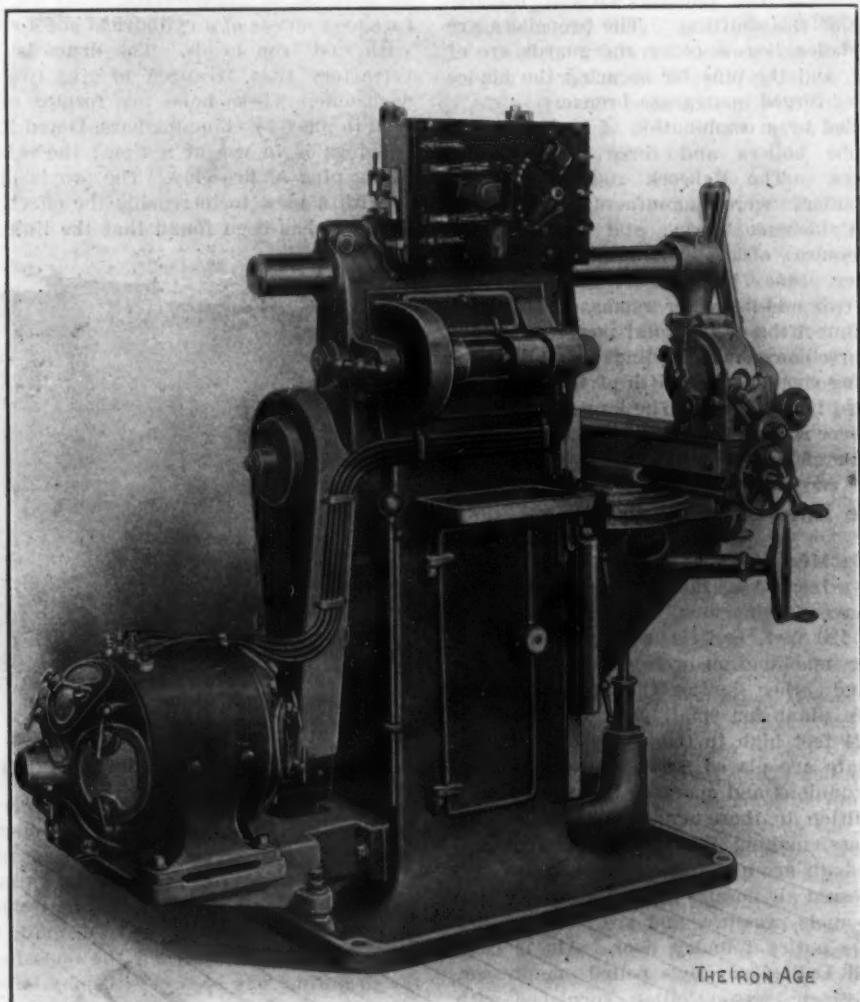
Rear Side View, Showing Motor Mounting, Connection and Control.
